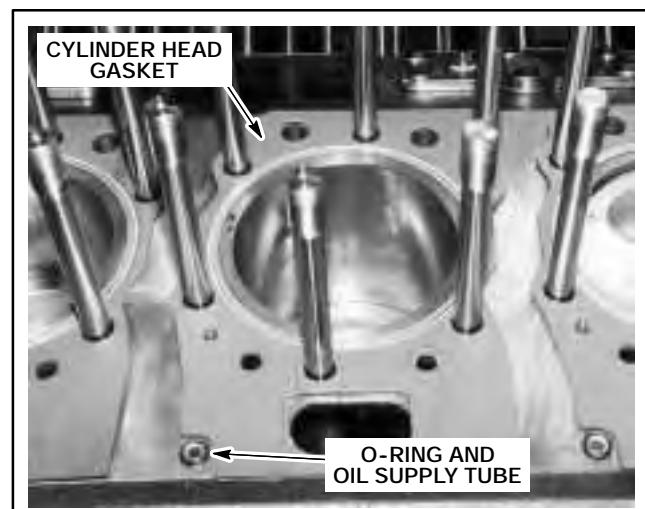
Cylinder Head Gasket - P/N 300000B
